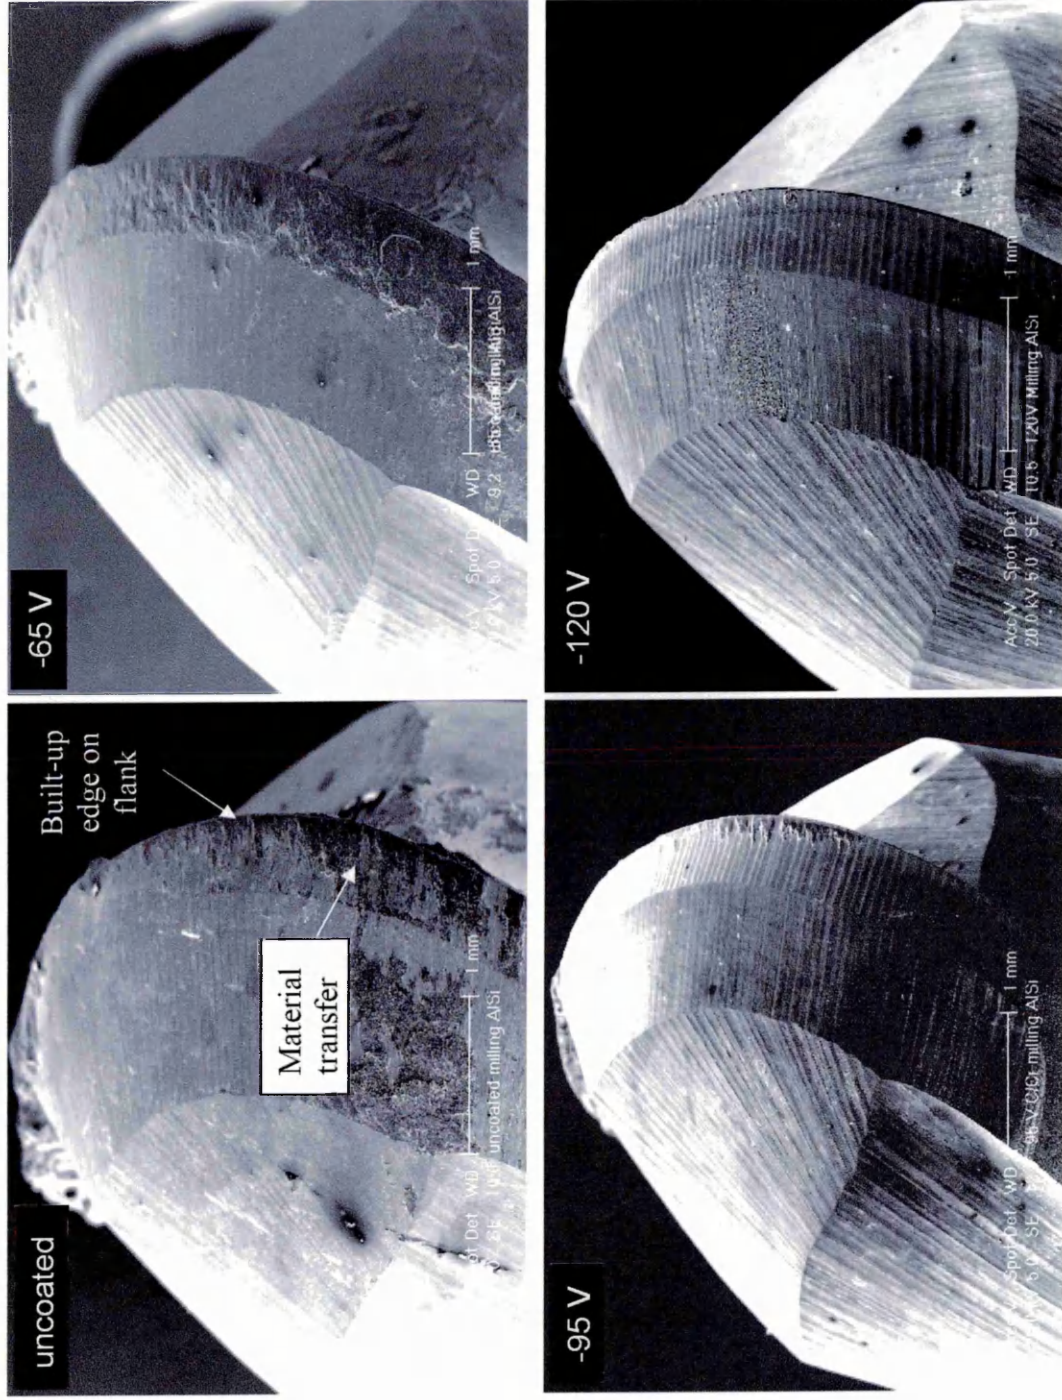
SEM images of uncoated and C/Cr coated ($U_B = -65, -95, -120$ V) end mills after milling 135720 mm³ AlSi alloy
